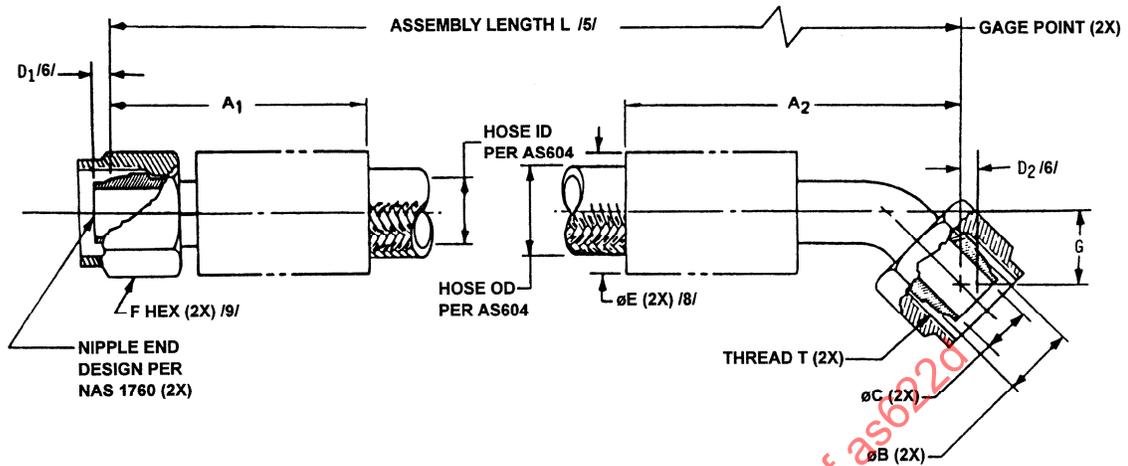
HOSE AND FITTING DIMENSIONS
